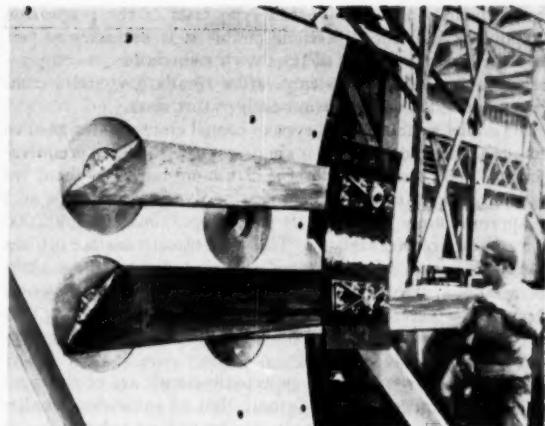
COMPRESSOR-STATOR BLADES ARRANGED FOR TESTS OF BLADE-SHIFTING MECHANISM
